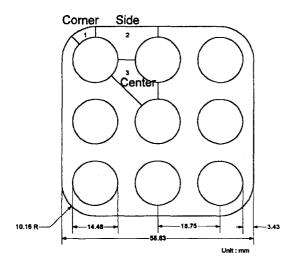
Cross-Sectional View of GE 9-Rod Bundle.
